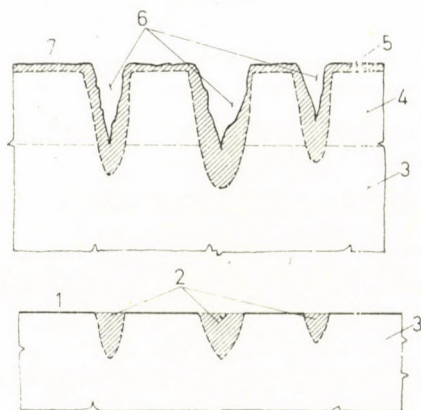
Lattice defects due to deep scratches (1 polished surface; 2 damaged crystalline parts; 3 bulk crystal; 4 the layer removed by polishing; 5 damaged layer; 6 scratches; 7 lapped surface)
